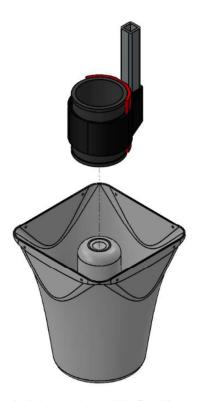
Wrench Adapter Assembly Position on Re-Entrant Tip
